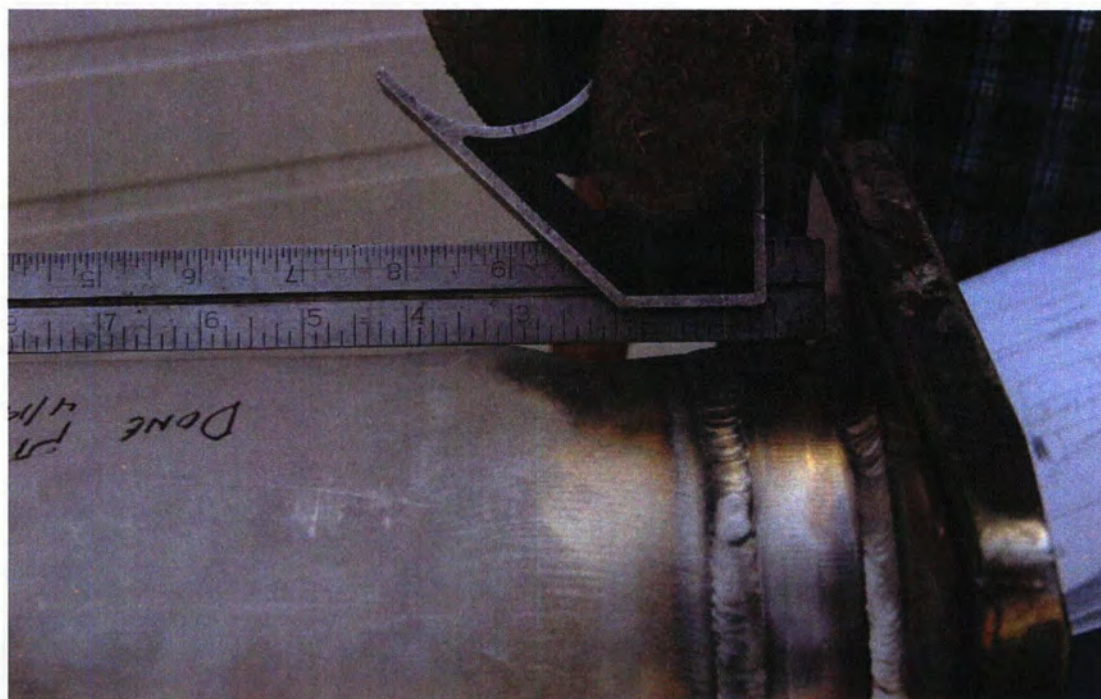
Tube to Bottom End Plate – View 1
